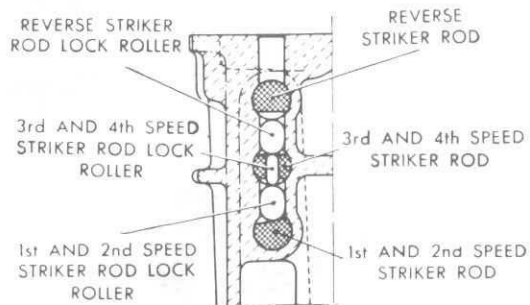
10 How the interlock detent rollers are positioned between the selector rods to prevent engagement of two gears at once
